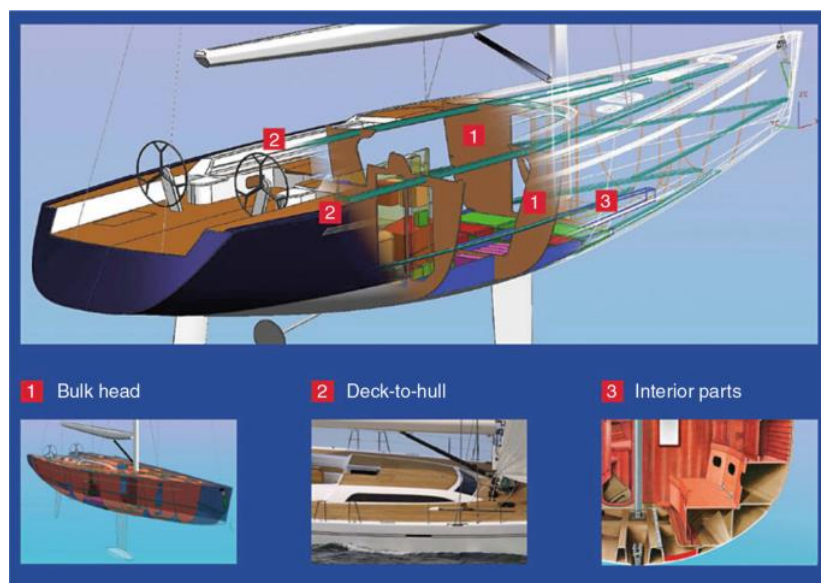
Bulkhead-to-hull, deck-to-hull, and interior part joint examples
